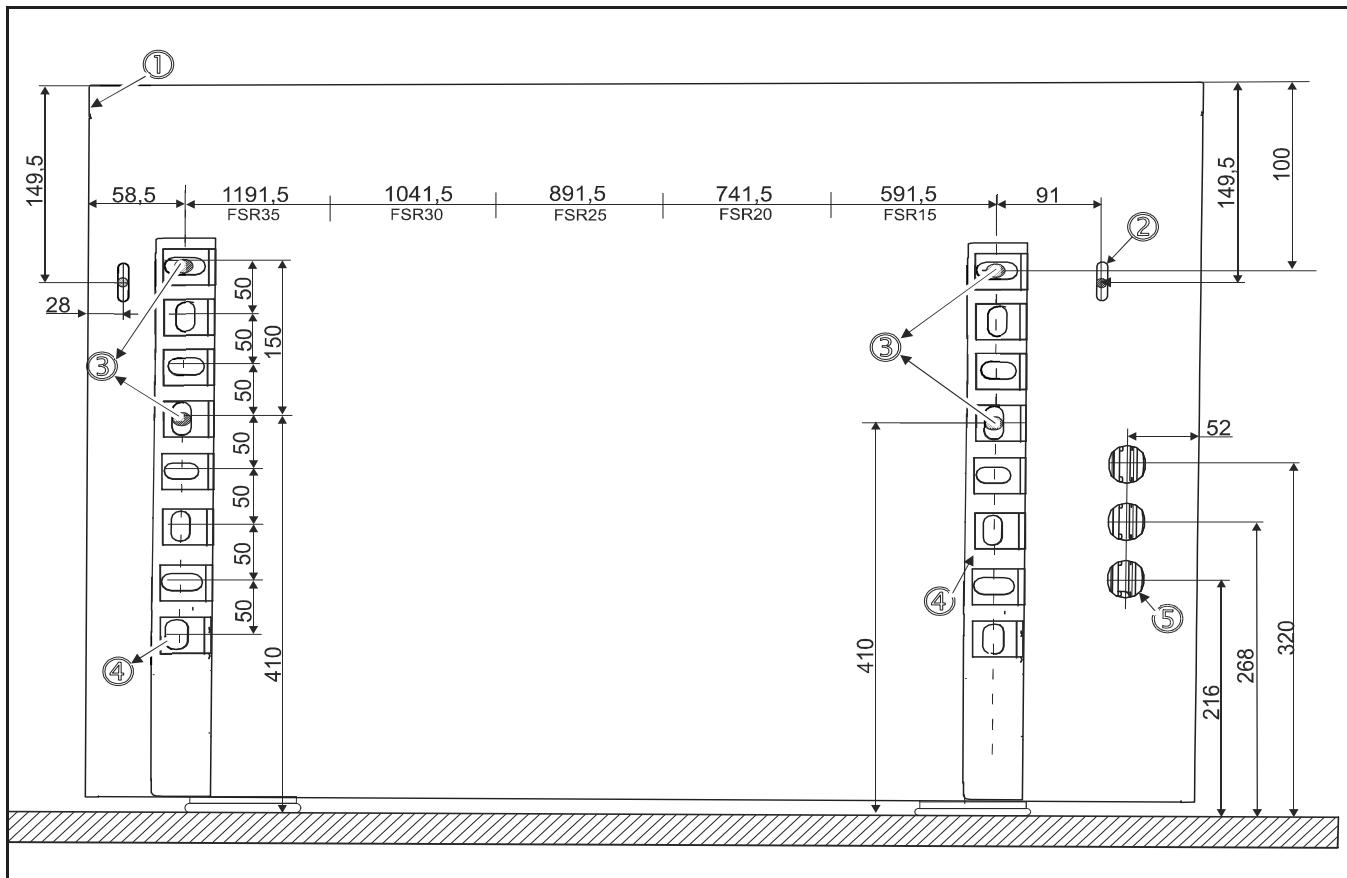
Drilling template for floor installation or wall mounting with standard wall brackets (device seen from front)
